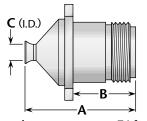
(One-Step cable attachment—see page 74 for details) | Figure 3 (One-Step cable attachment—see page 74 for details)
